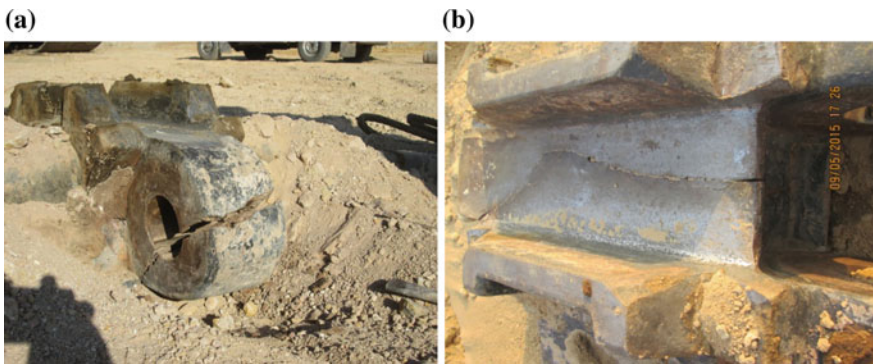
Examples of damage: a fracture of the crawler pad link; b damaged raceway of a crawler link
